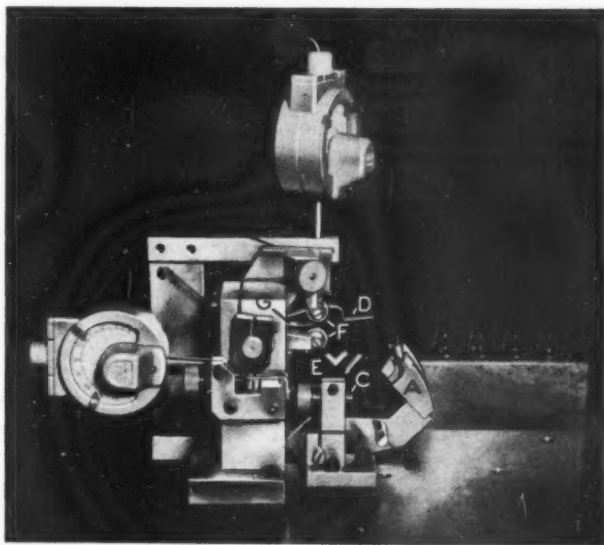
Side View of the Machine Showing the Arrangement of the Gauging Heads
